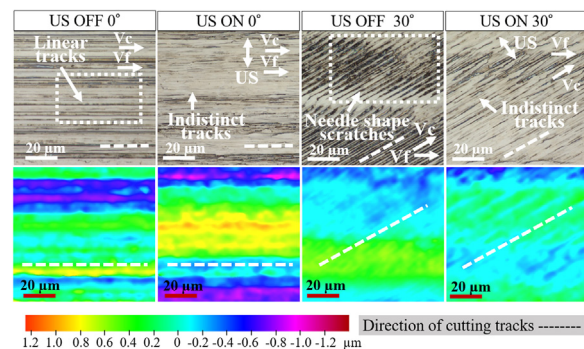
Micrographs and contour plots of workpiece surfaces machined with B15 grinding points at test cessation.
